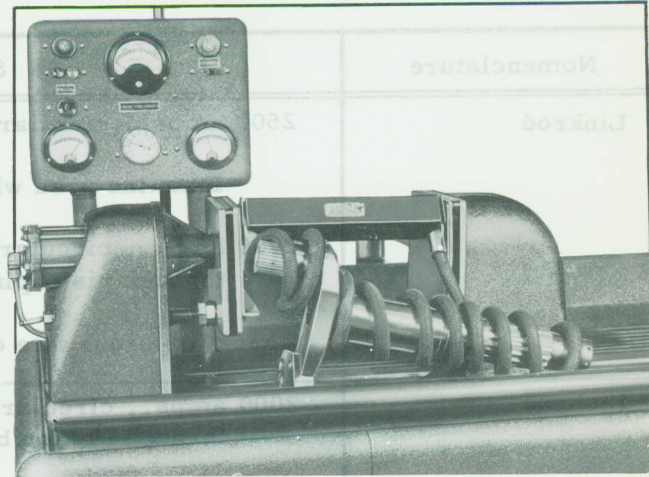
Magnetizing Magneto Drive Gear by D C
